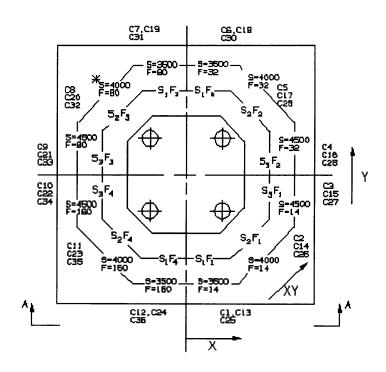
Steel Workpiece Machining Process Material: Carbon Steel C1020
